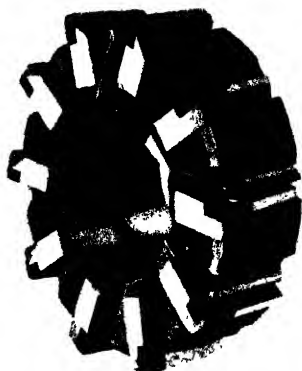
Carbide-tipped steel shell end mill. (*The O.K. Tool Company*)
